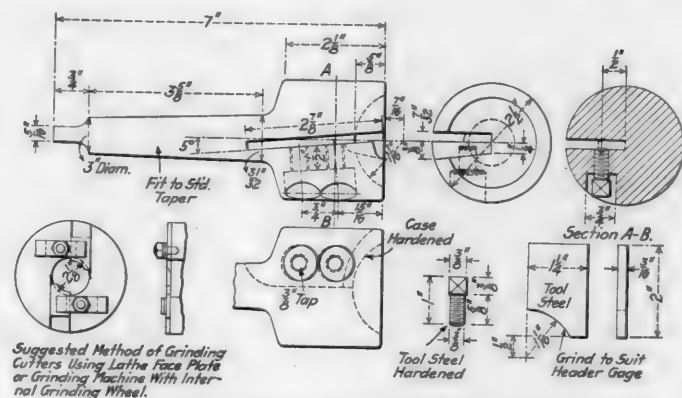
Tool for Facing the Ball Ends of Superheater Units
